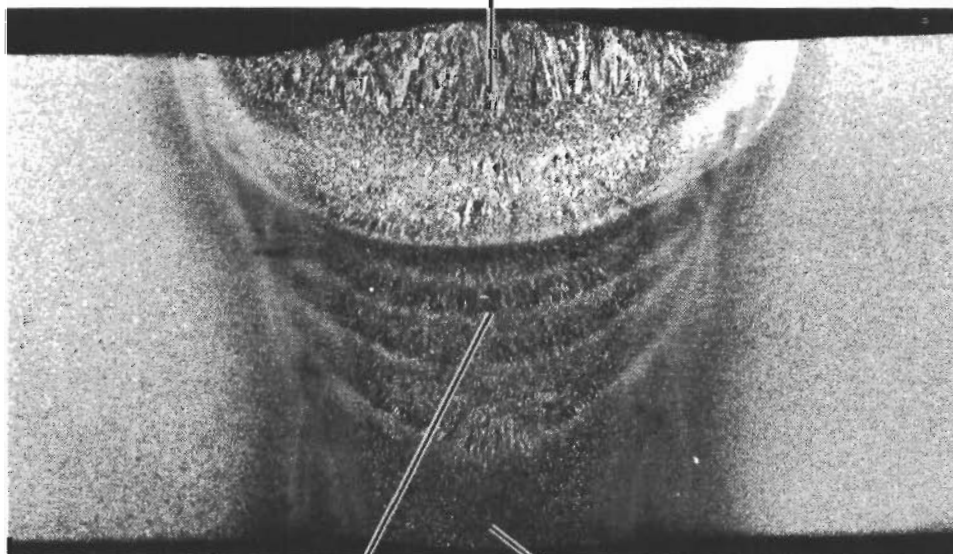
Weld-Metal Microstructure-As Welded. Six TIG Weld Passes in Grade 250, 1/2-In.-Thick, 18% Nickel Maraging Steel Plate, Heat 120D163, Filler Wire 7C-093
